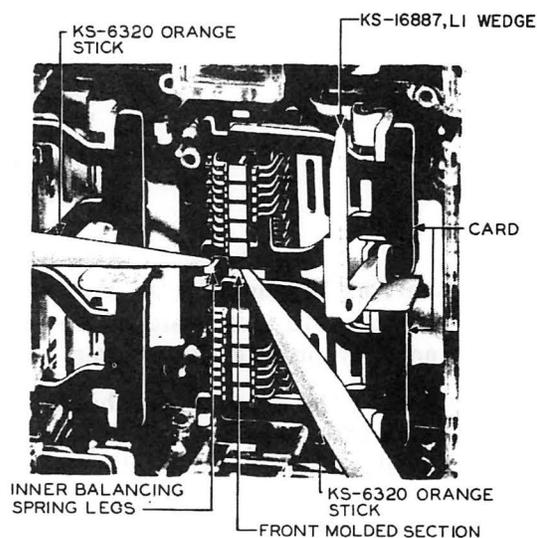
Disengaging Inner Balancing Spring Leg From Upper Card
